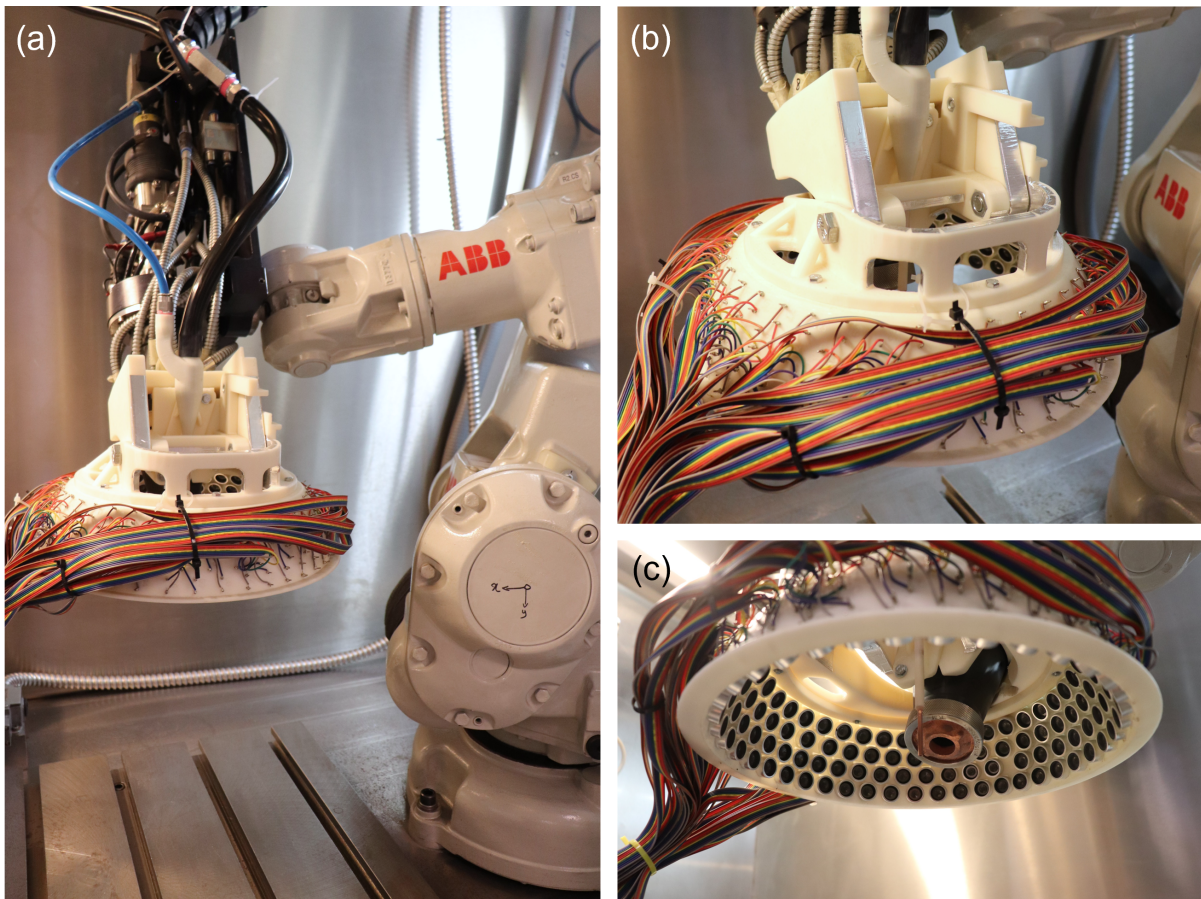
(a) Modified DM3D machine. (b) Top close-up showing ultrasound array, frame and gas cyclone. (c) Bottom close-up showing ultrasound transducers, powder nozzle and water bypass insert.
